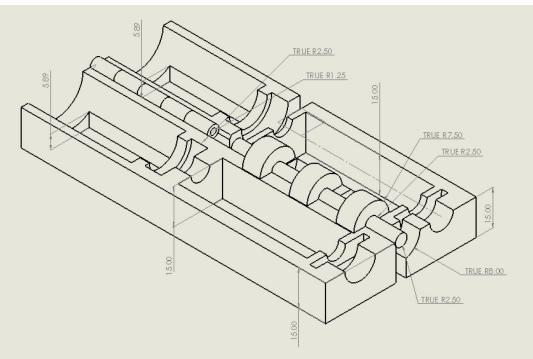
Depicted above is another drawing of the Binder design. Again, all dimensions are in millimeters, and a circle with a backslash denotes a diameter.
